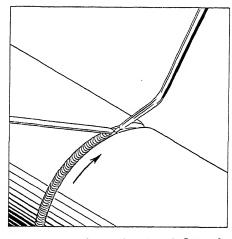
Position of rod and flame for making rolling weld by the Lindeweld process.
